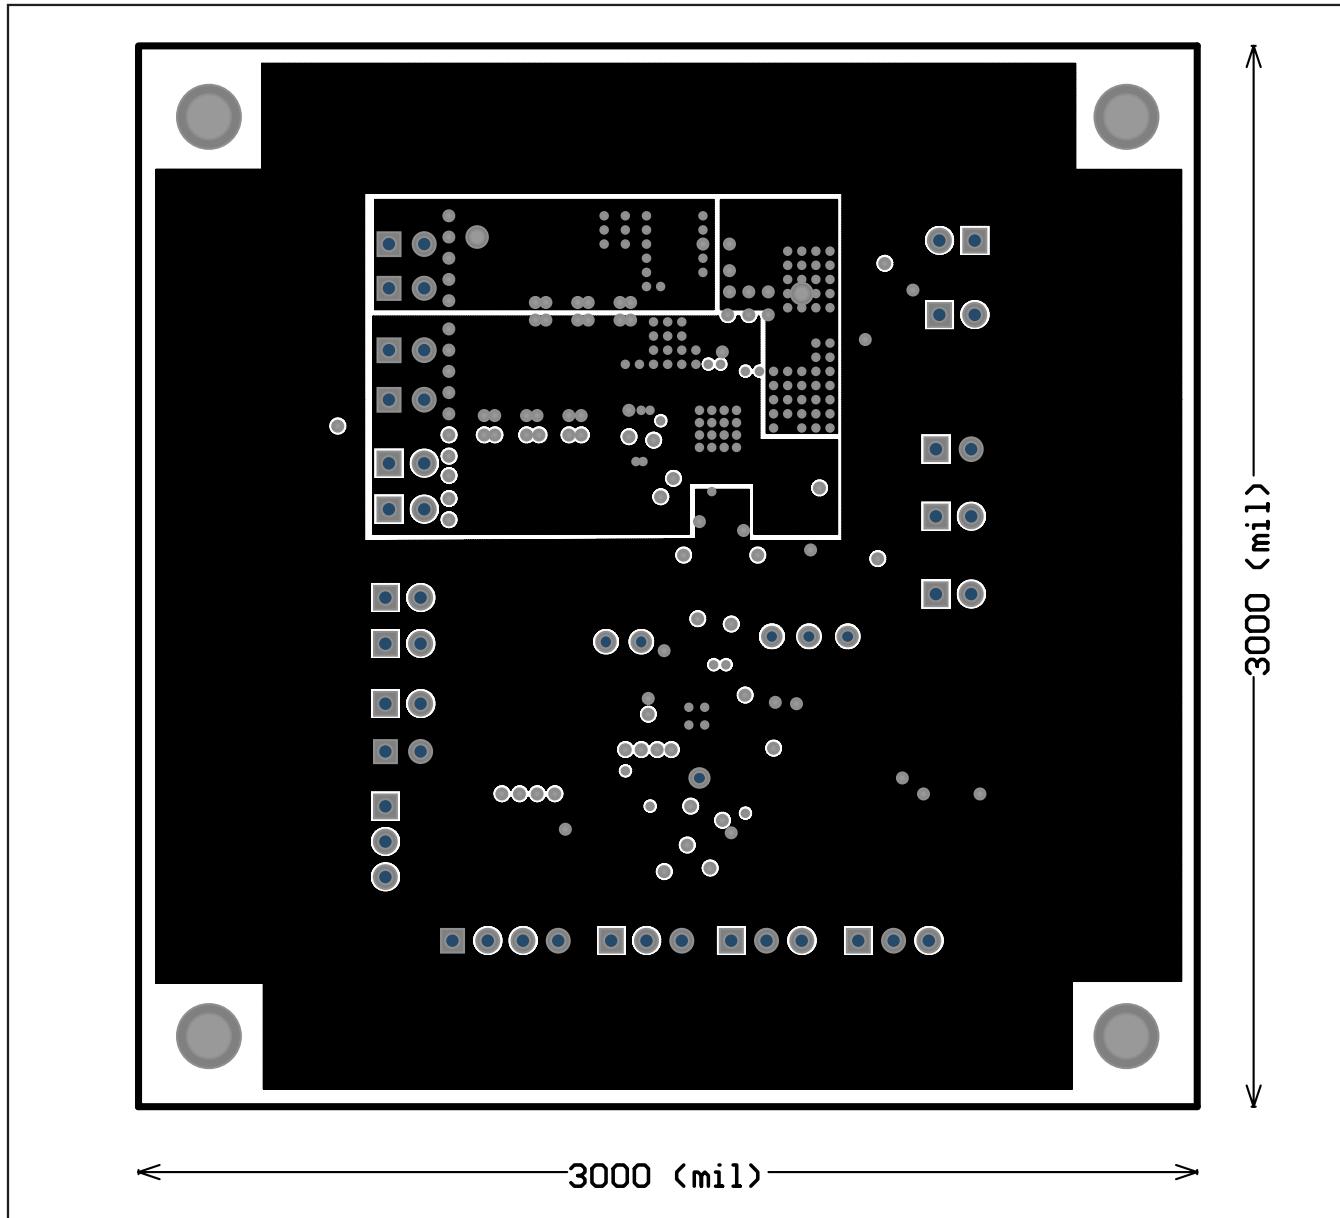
MAX8654 EV Kit PCB Layout—Inner Layer 4
